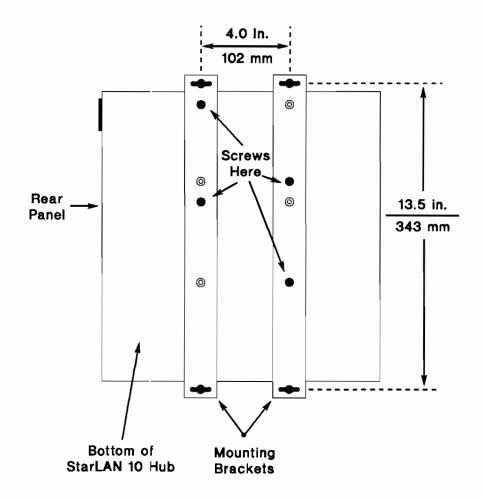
Bottom View of the StarLAN 10 Hub with Mounting Brackets
